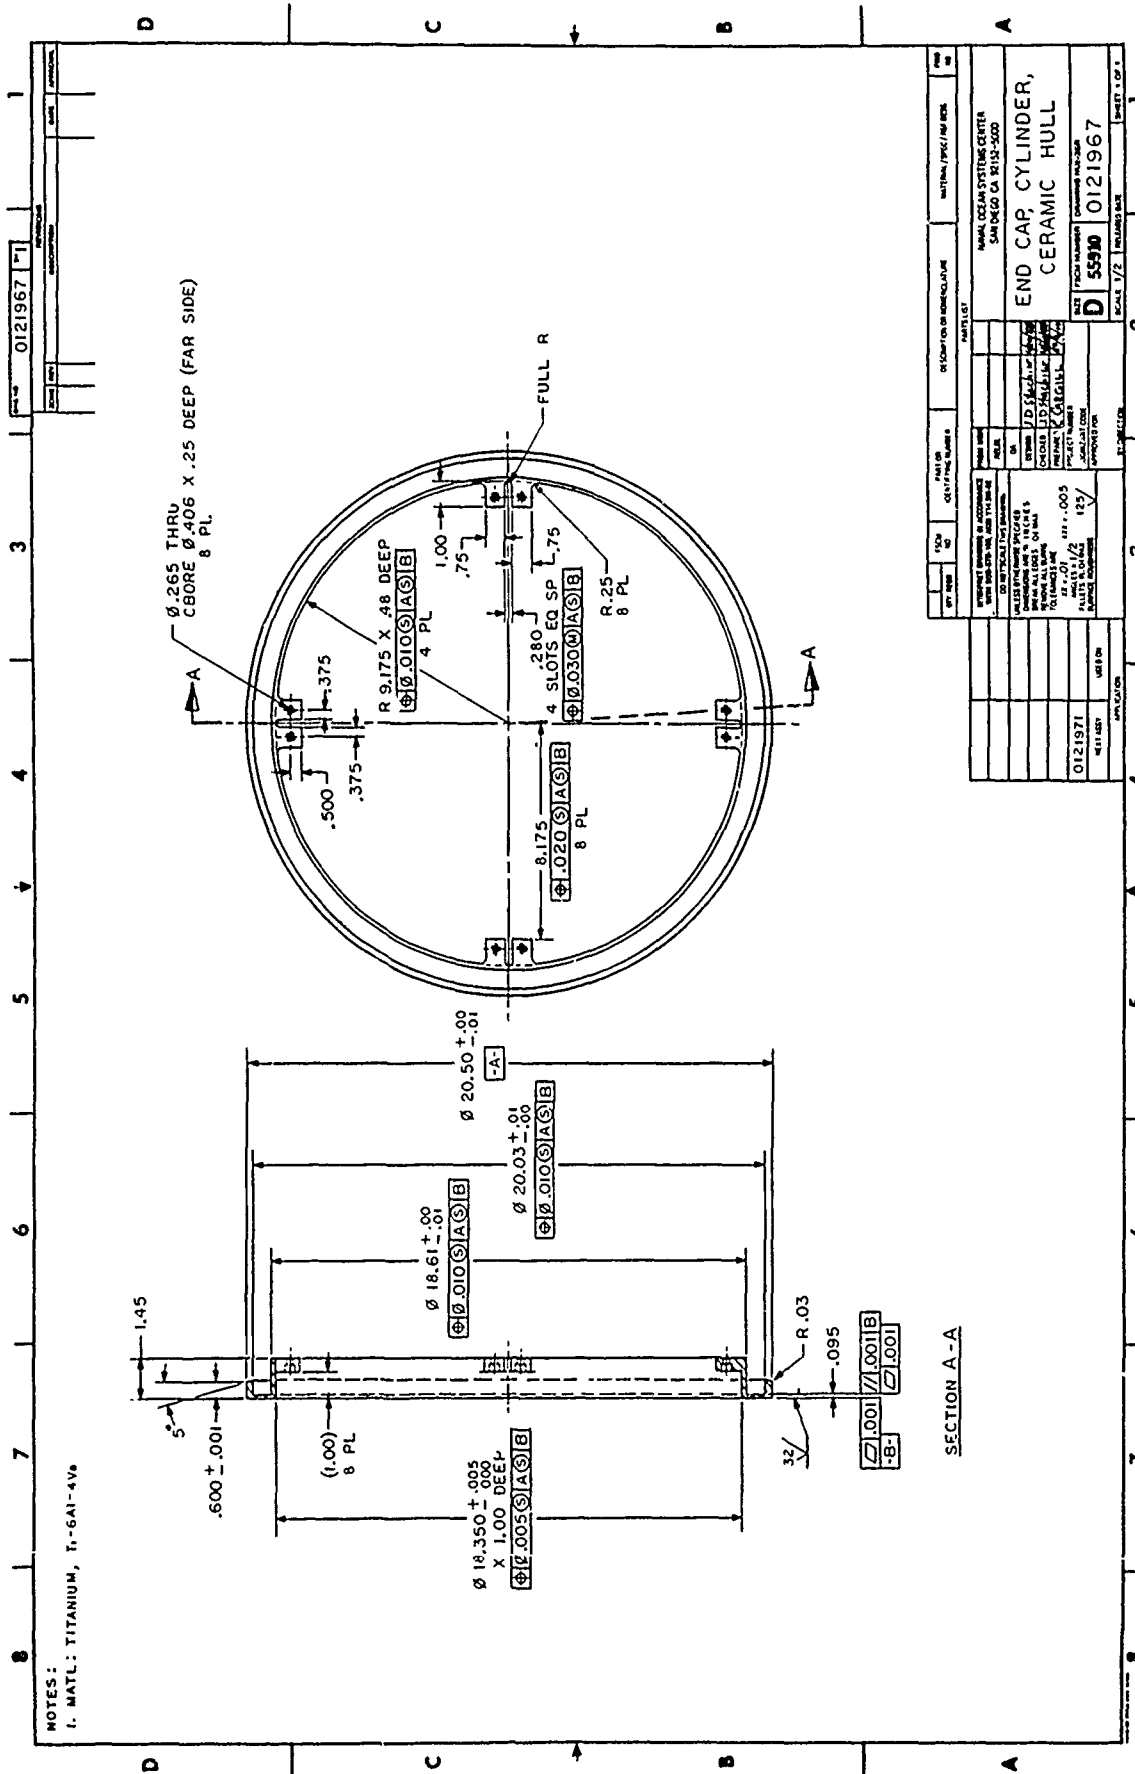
Fabrication drawing of Mod 0 end cap for 20-inch ceramic cylinders.
